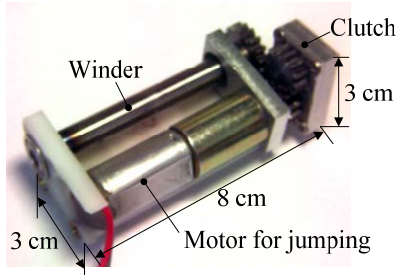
Jumping mechanism using planetary gear and one-way clutch.
